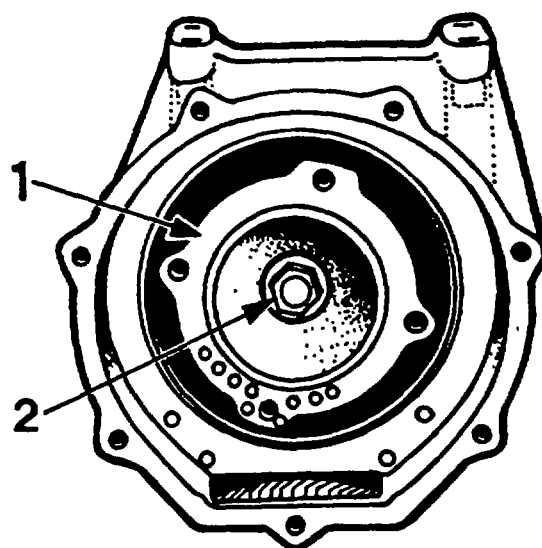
Removing Injection Pump Drive Gear Cover and Dipstick
